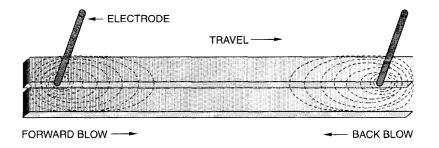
Distorted Magnetic Fields and Ends of Welds
